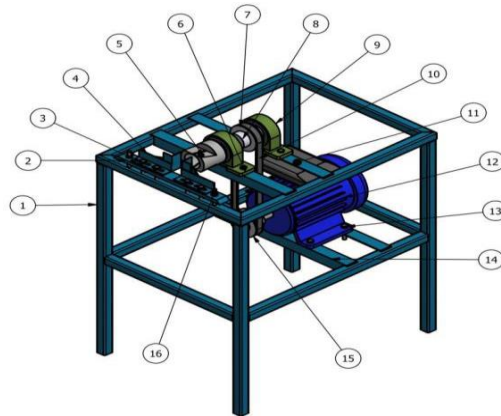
The design of the lathe machine for the production of the wooden broom handle
